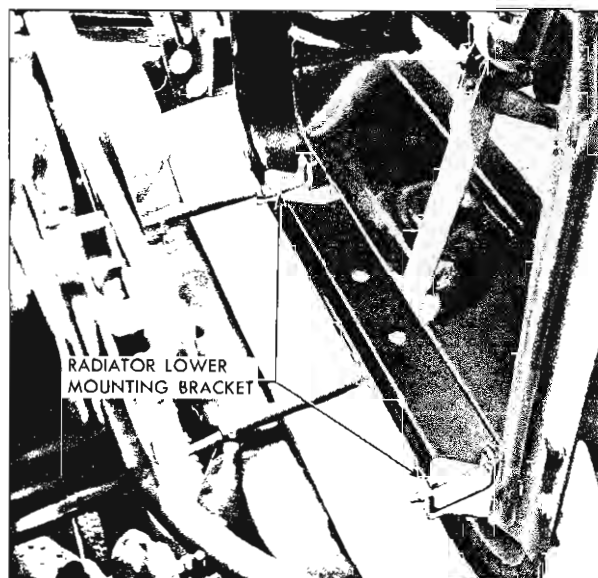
Location of Radiator Assembly Lower Mounting Brackets
